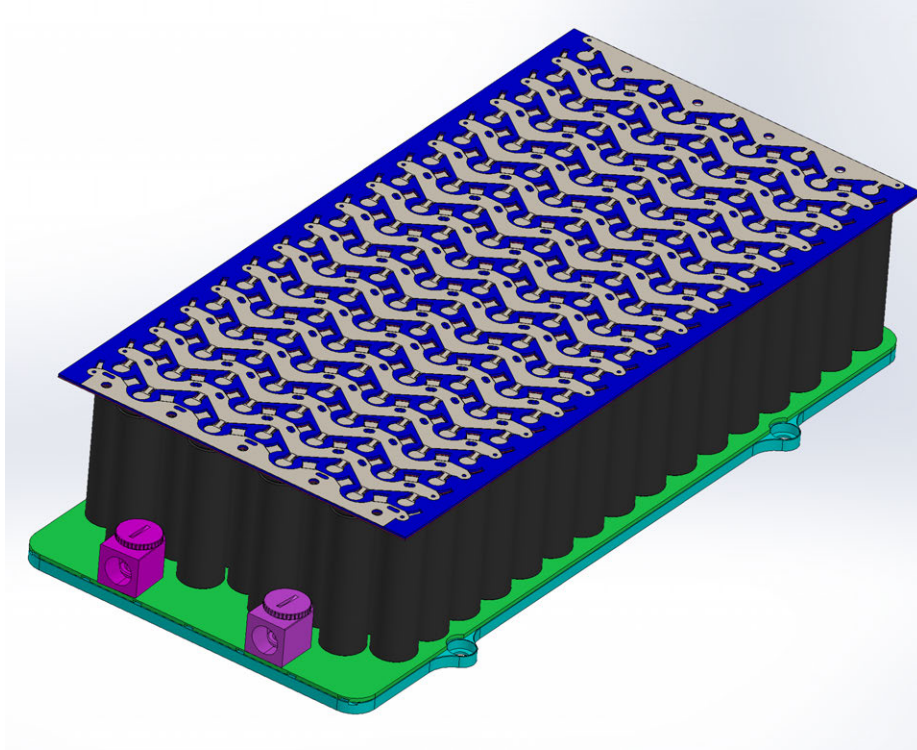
CAD model of the novel design. The top blue PCB insulates the nickel foil bus bars spot welded to the top of the cells forming a 16S9P module. The MCPCB (green) and cold plate base (blue) are soldered on to the cell array.
